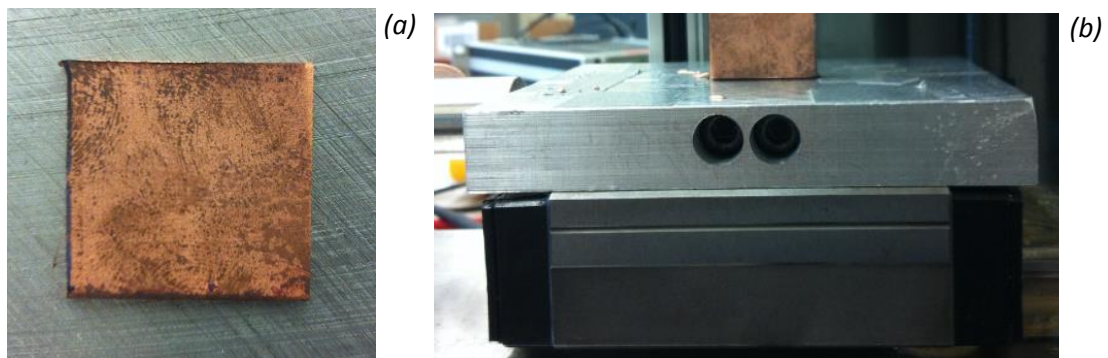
Workpiece for the experiments performed on the linear slide cutting machine: (a) machined to the required dimensions, (b) fastened on the work table
